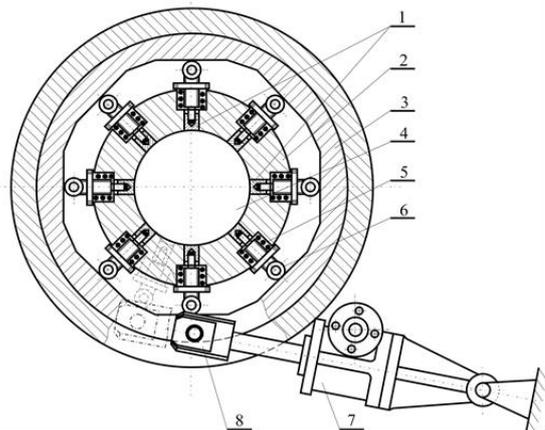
Schematic of the cross section of a plasticizing system with an active grooved feed section: 1 - adapters, 2 - rotationally fixed sleeve, 3 - rotatable sleeve, 4 - feed opening, 5 - spring, 6 - roller, 7 - lifting spindle gear, 8 - bolt [2]
